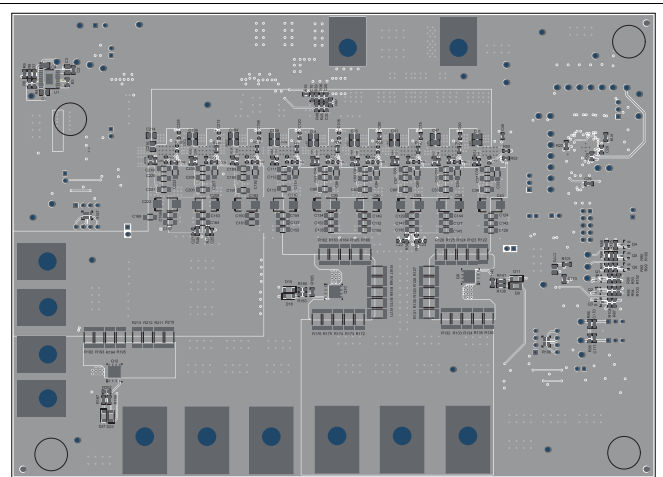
Bottom Layer Assembly Drawing (Bottom View)
